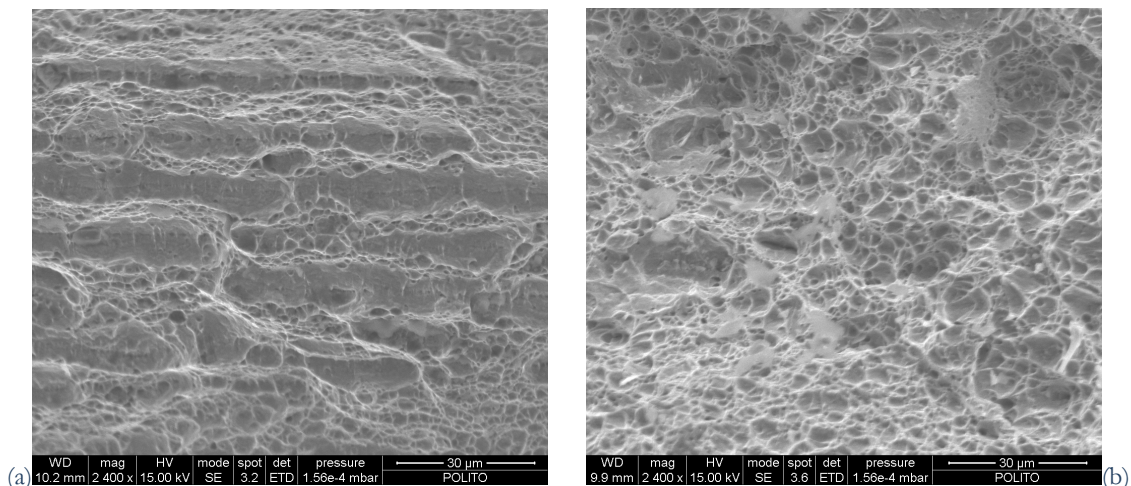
Fracture surfaces of TWIP and Mn-B tensile specimens.
